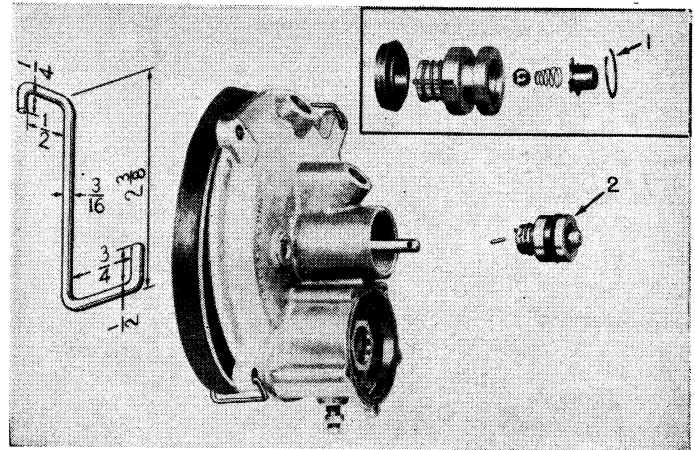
Removal of hydraulic piston from push rod. Inset shows disassembly of hydraulic piston
